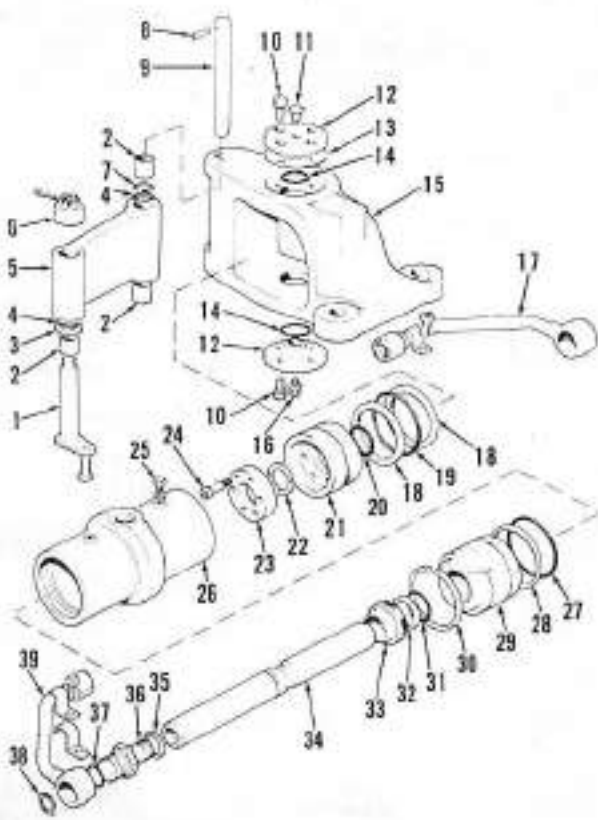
Exploded view of steering cylinder and yoke assembly used on some 1210 and 1212 model tractors and all 1410 and 1412 model tractors. Refer also to Figs. 28 and 29.
